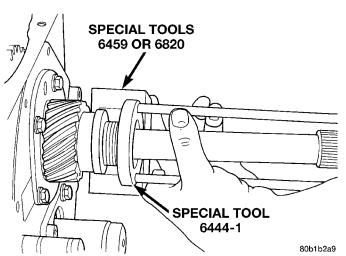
Seating Puller Flange In First Puller Jaw
